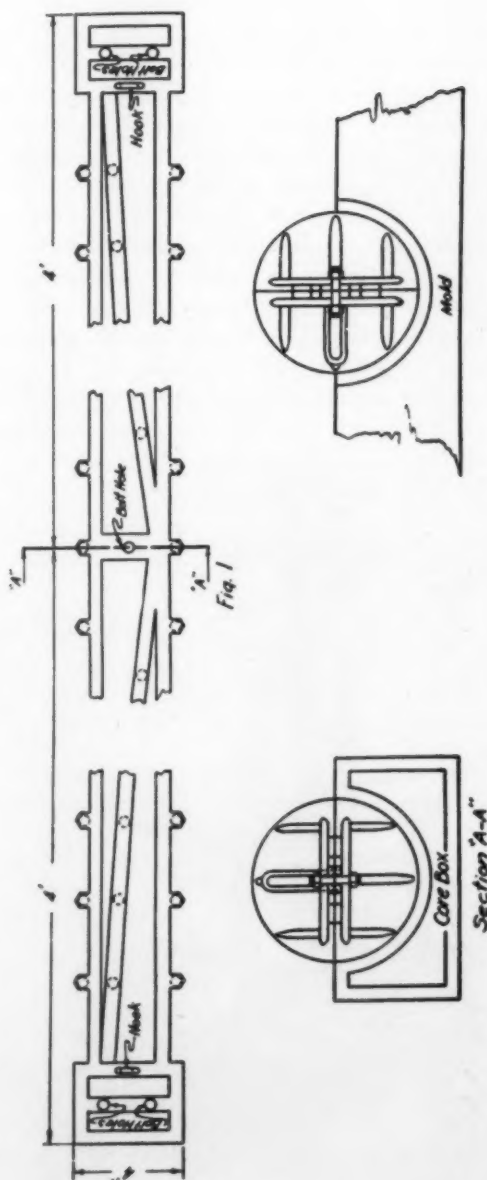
PLAN VIEW OF ARBOR FOR 6-IN. x 8 FT. CORE. FIG. 2—SECTION VIEW OF CORE AND ARBOR. FIG. 3—CORE AND ARBOR IN MOLD.
